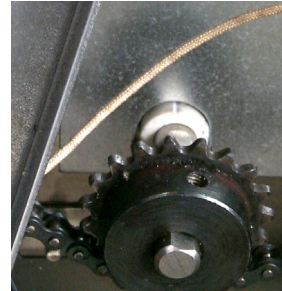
Ensure brace straddles bushings surrounding roller shafts.
